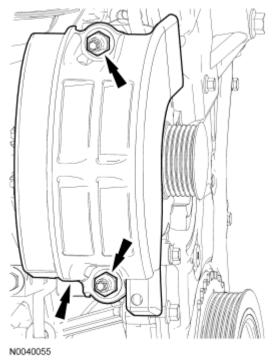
Locating Generator Splash Shield And Nuts Courtesy of FORD MOTOR CO.
